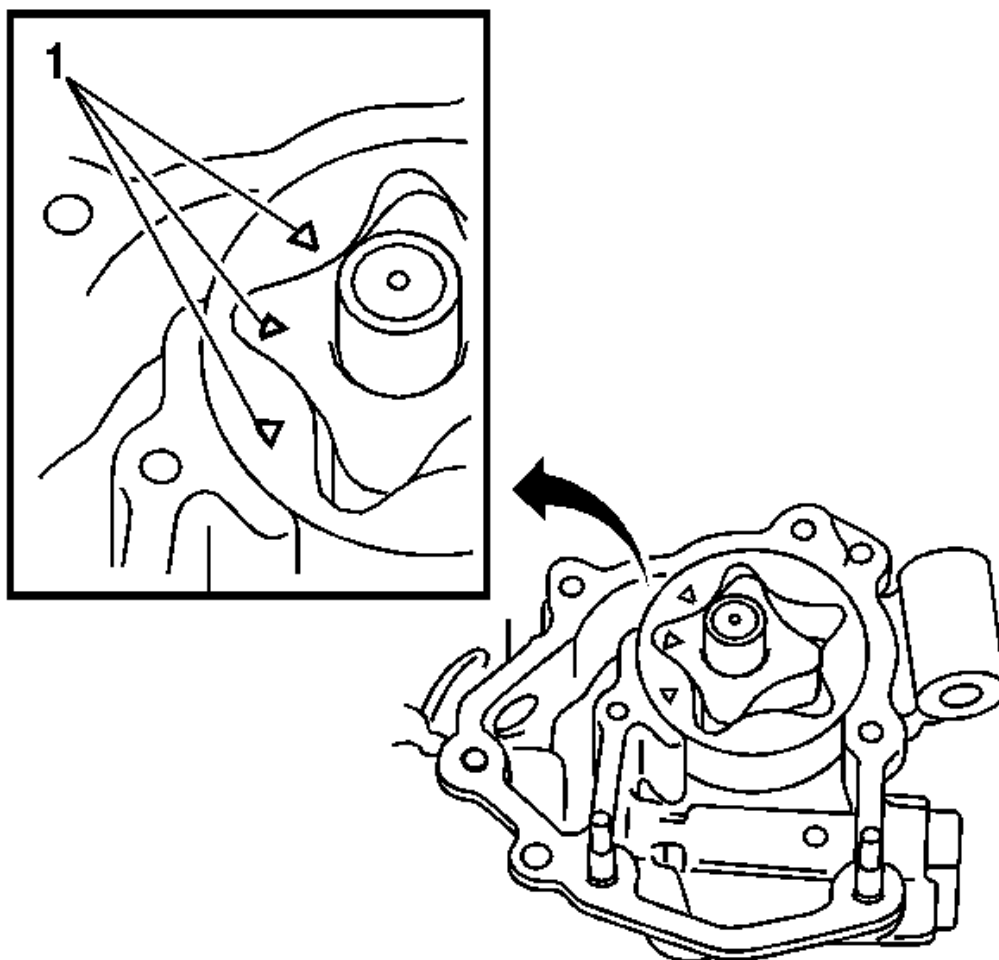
View Of Coating Drive Rotor And Driven Rotor With Engine Oil.
